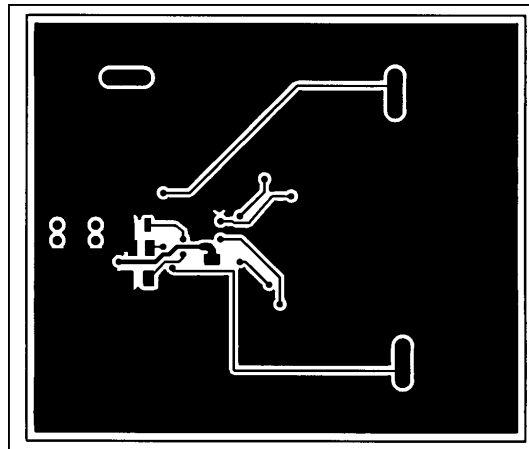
MAX742 EV Kit PC Board Layout—Solder Side
